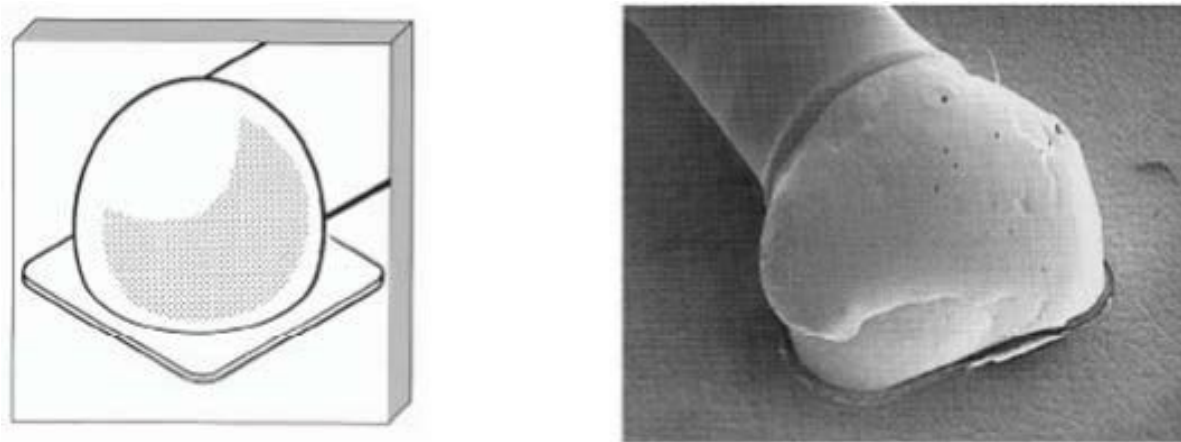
Unacceptable -- Excessive solder (see also Table 11-3)
